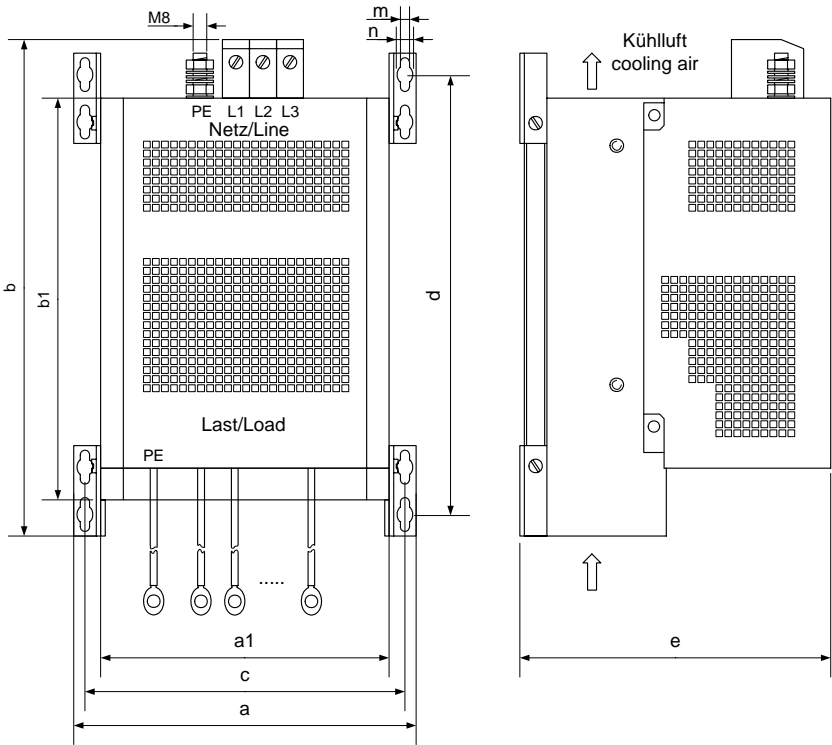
Dimension drawing, mains filter, frame size 2
